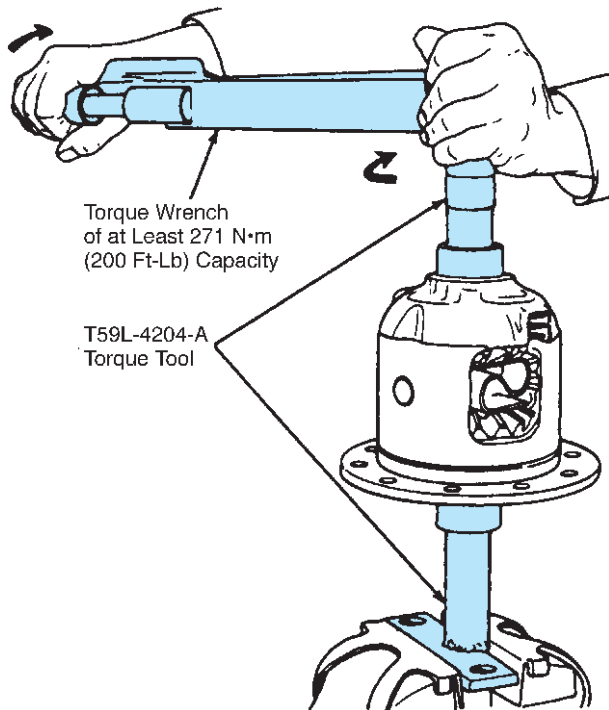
Torque tools allow the breakaway torque of this limited slip differential to be measured before the differential is installed into the carrier. (Courtesy of Ford Motor Company)
